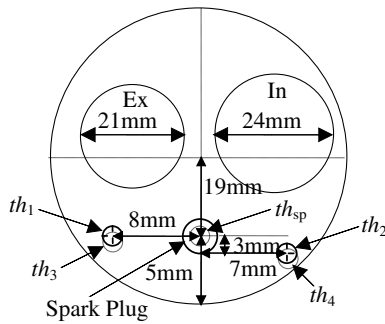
Inside view of the locations of thermocouples on the cylinder head.
